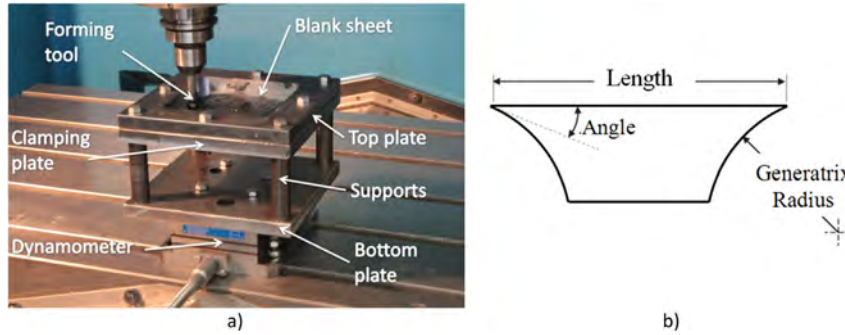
a) Experimental setup used on a 3 axis CNC milling machine. b) Design of the pyramidal frusta with a circular generatrix.
